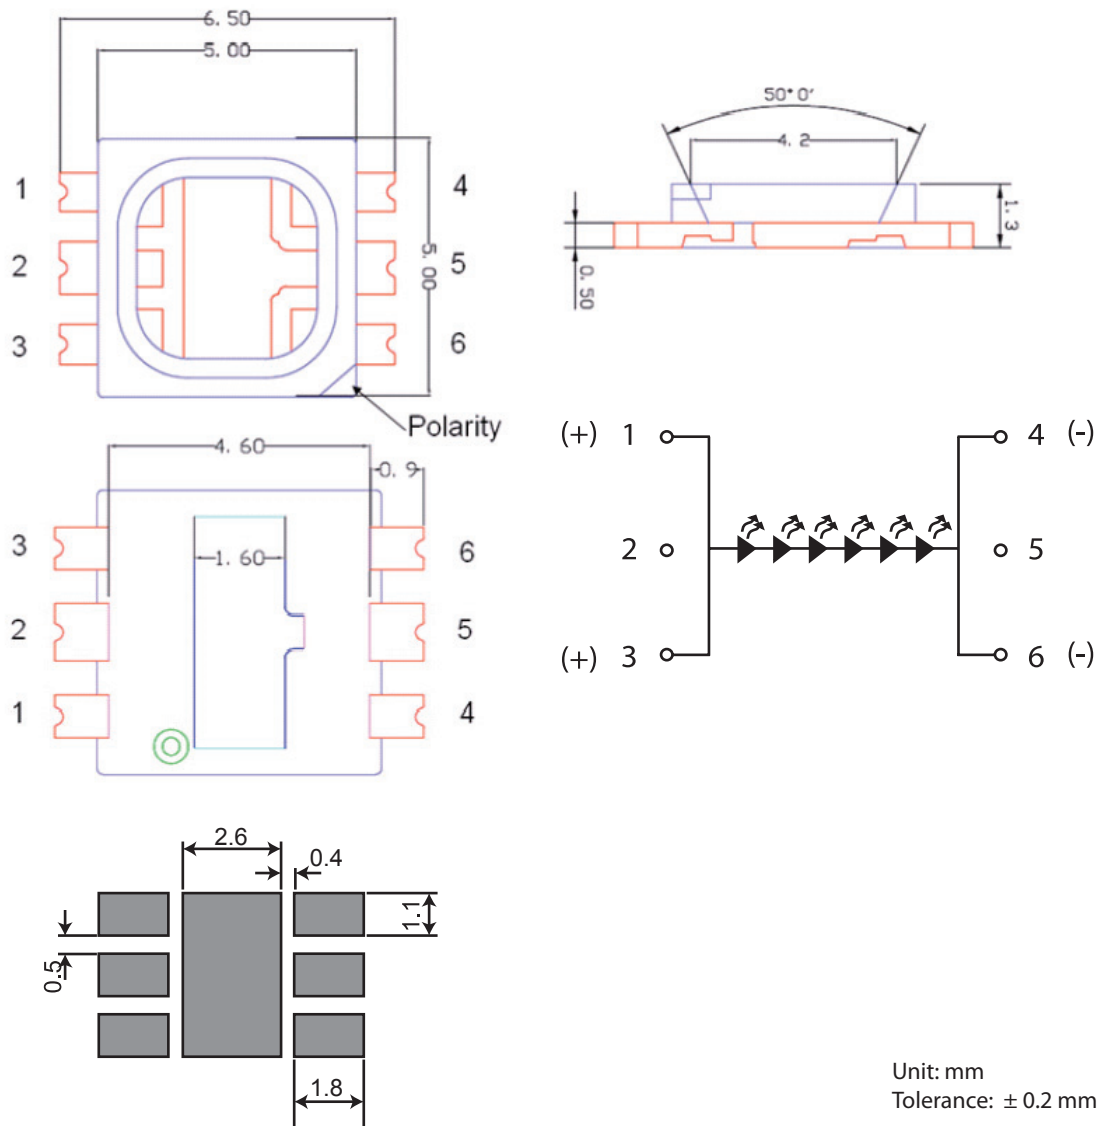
5050x PLCC Dimension, circuit diagram and recommended soldering pad
